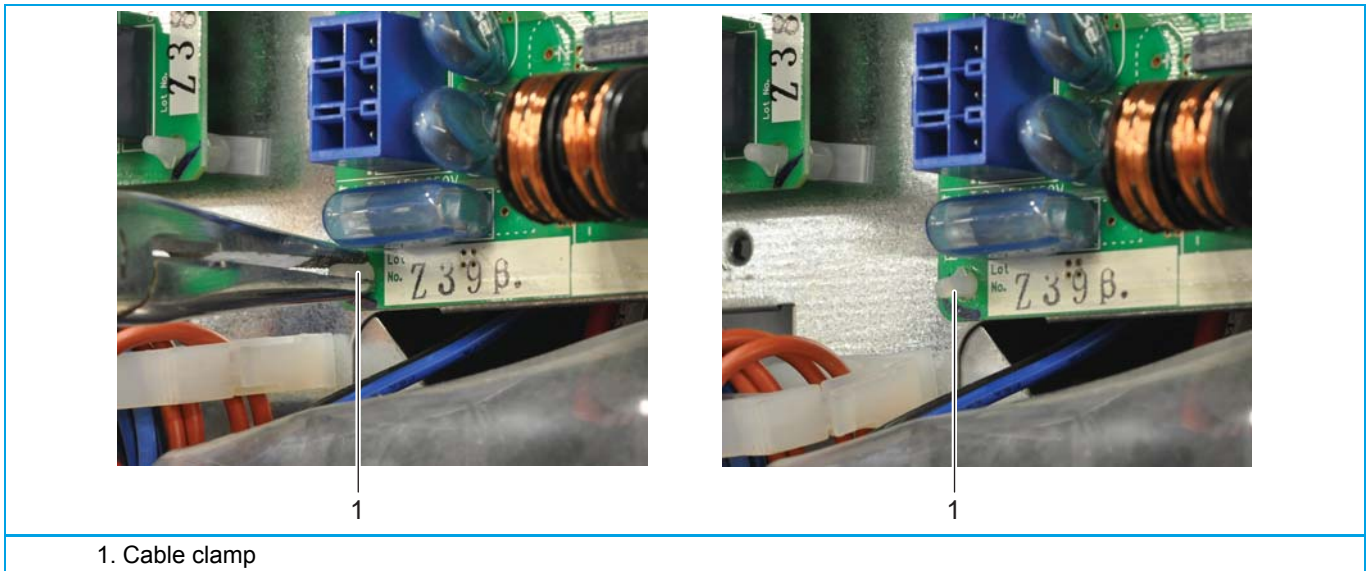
Unlocking and tilting the main and sub board assembly (REM5T7Y1B, REYQ8~12T7Y1B)
